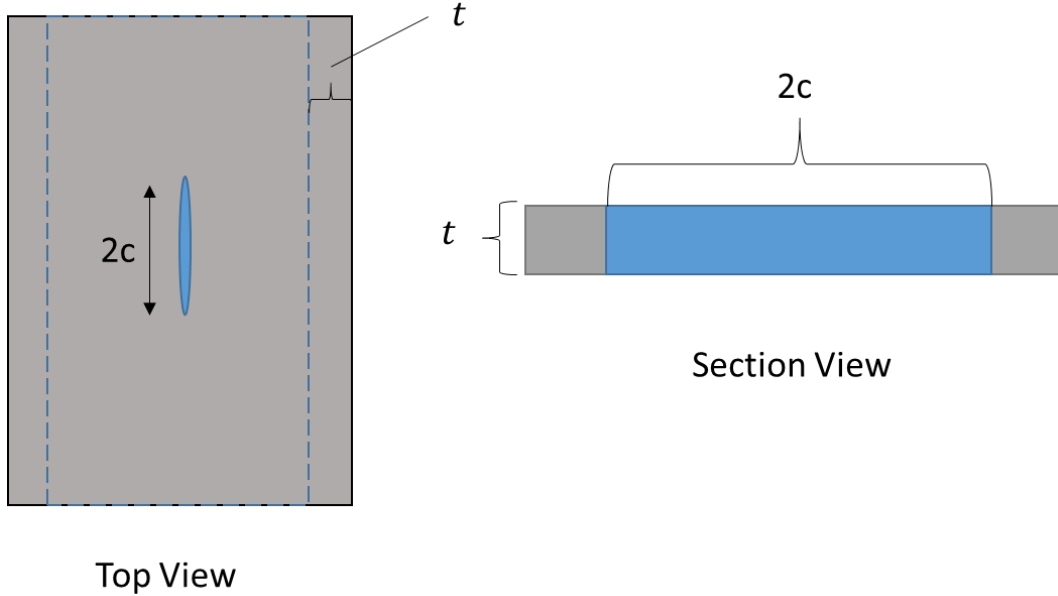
Modeling through wall cracks using Log-Secant method [5]
